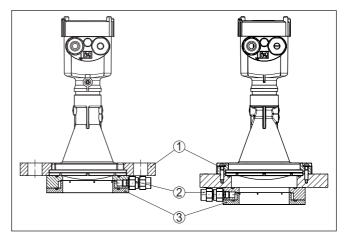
Rinsing connection with radar sensor with compression flange or adapter flange ASME 3"
